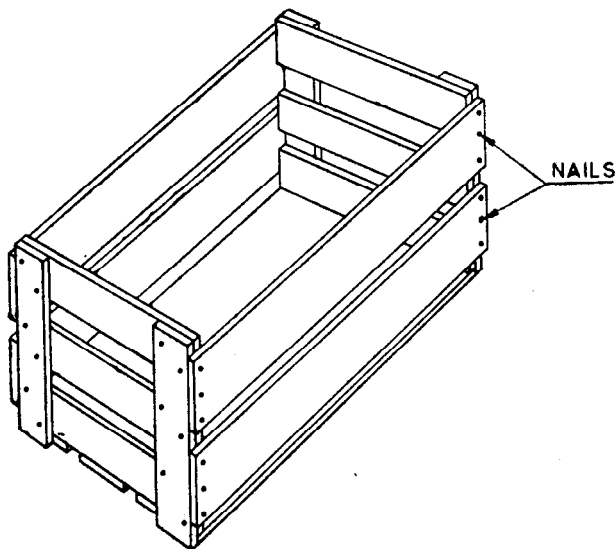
NON-RETURNABLE WOODEN BOX WITH RAISED AND EXTERIOR BATTENS (NAILED)
